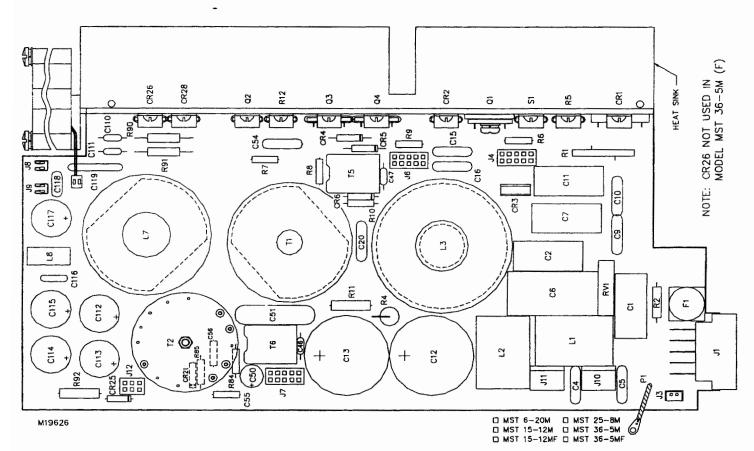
COMPONENT LOCATION OF MST ASSEMBLY A1
